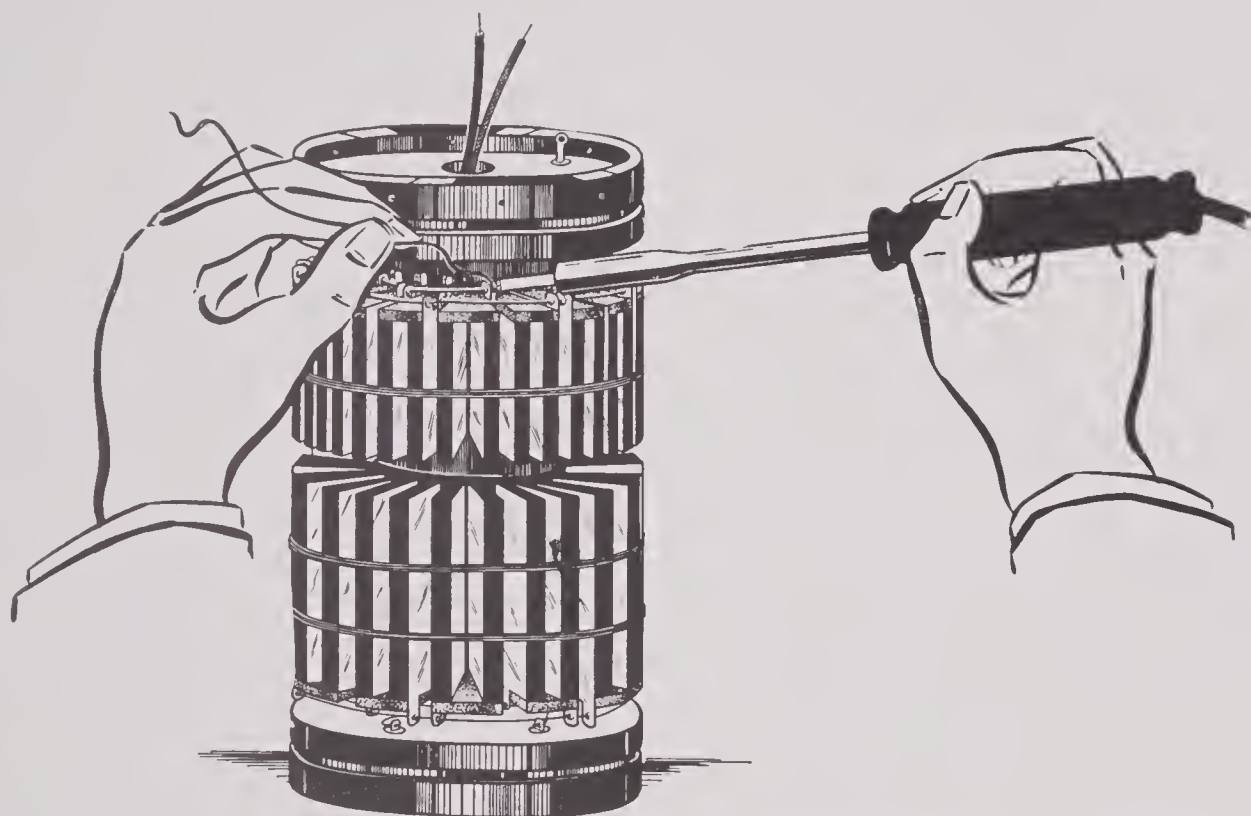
Soldering wires to the foil strips in a UCDWR cylindrical transducer. Note the use of metal-glass terminal seals; also the grooves provided for O-ring hydraulic gaskets with which to seal the completed assembly into its cylindrical housing.
